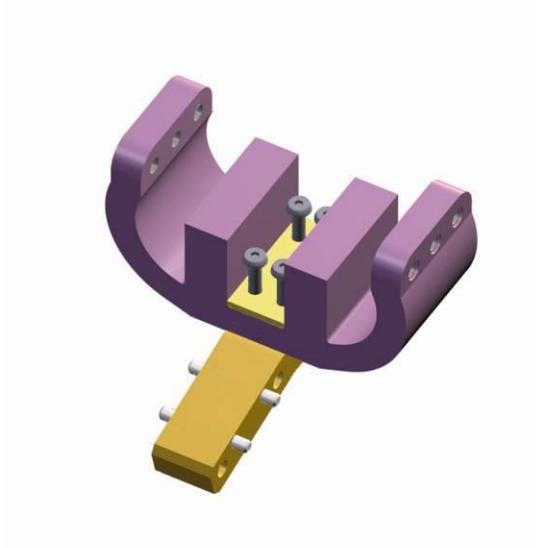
Separating the upper lumbar clamping plate and lumbar mounting wedge
